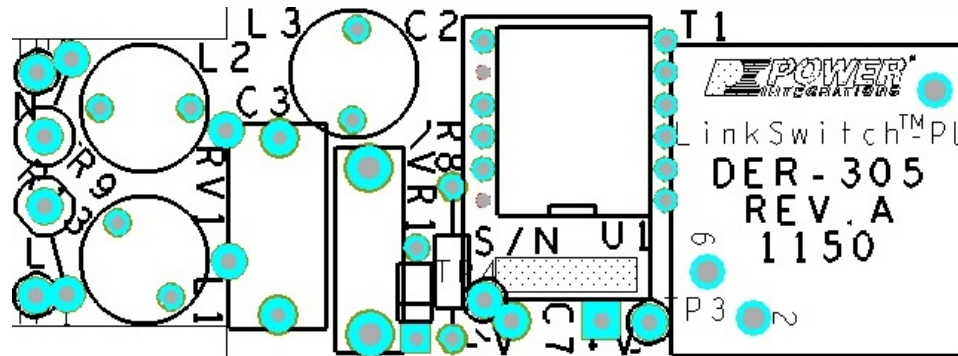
Top Side. Dimension 53.5 mm x 19.6 mm
